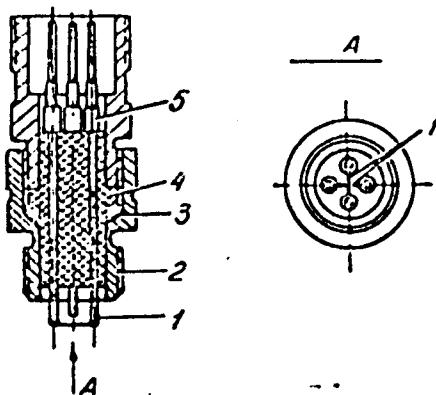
1--heat sensors; 2--housing; 3--sealing gasket; 4--insulators; 5--holders
